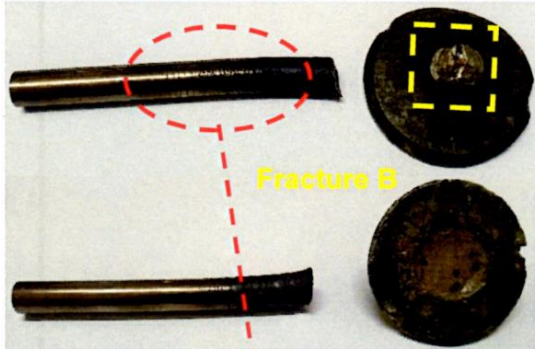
Position of Fracture B, exhaust valve stem condition (digital)
